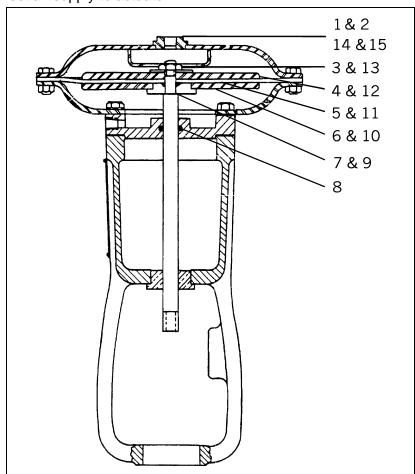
Diaphragm Replacement, Springless Type Actuator
